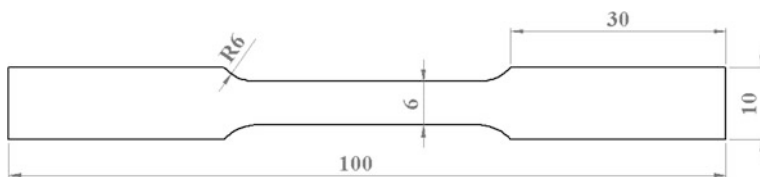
Schematic drawing of tension test specimen (Thickness = 6 mm)
